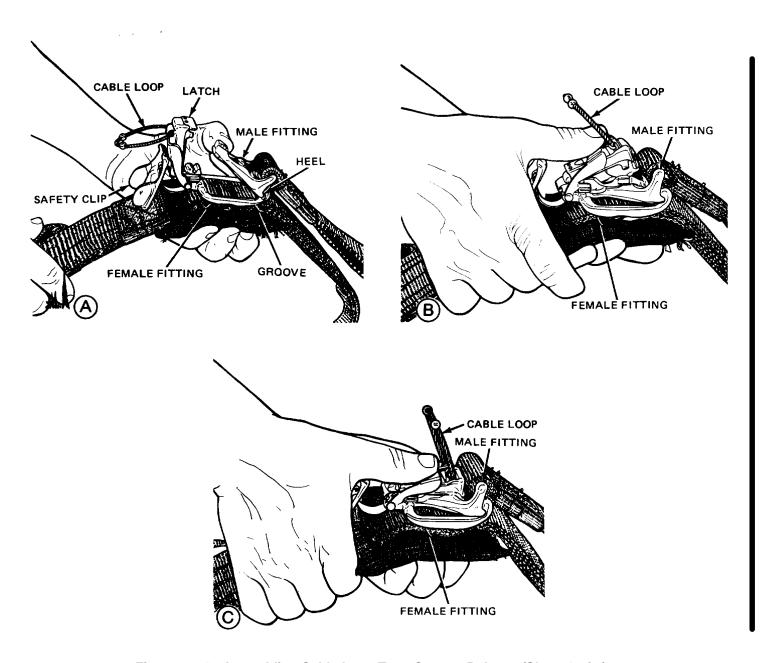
Assembling Cable Loop Type Canopy Release (Sheet 1 of 2).
